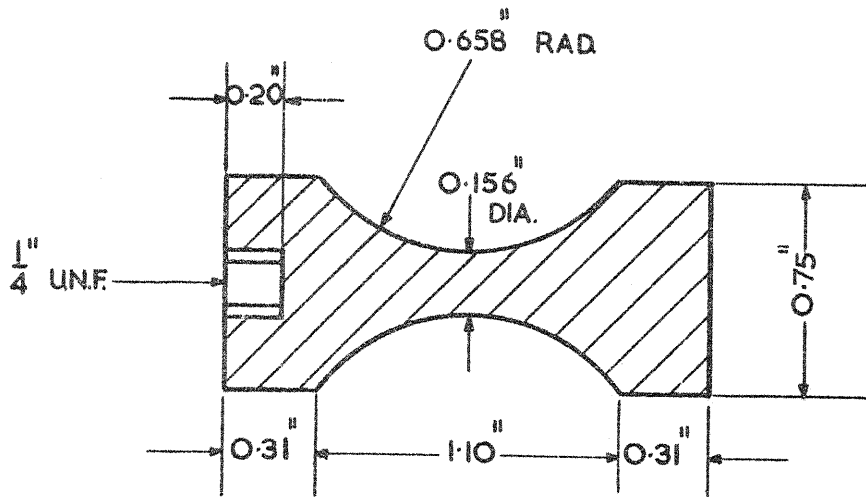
ALUMINIUM ALLOY SPECIMEN
